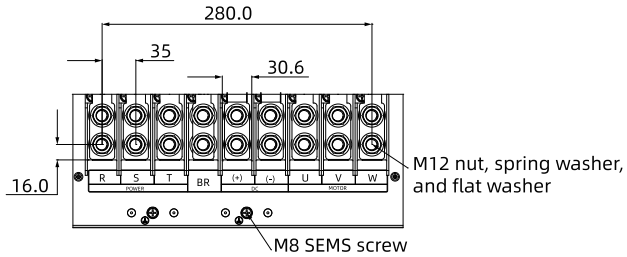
Main circuit terminal dimensions for T4 models (75 kW to 90 kW, in mm)
